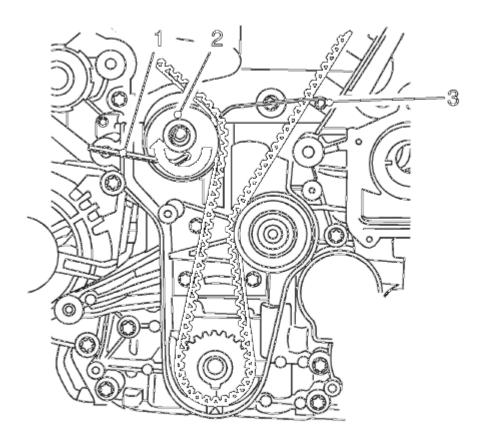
Timing Belt Tensioner, Locking Pin And Allen Key Courtesy of GENERAL MOTORS COMPANY
